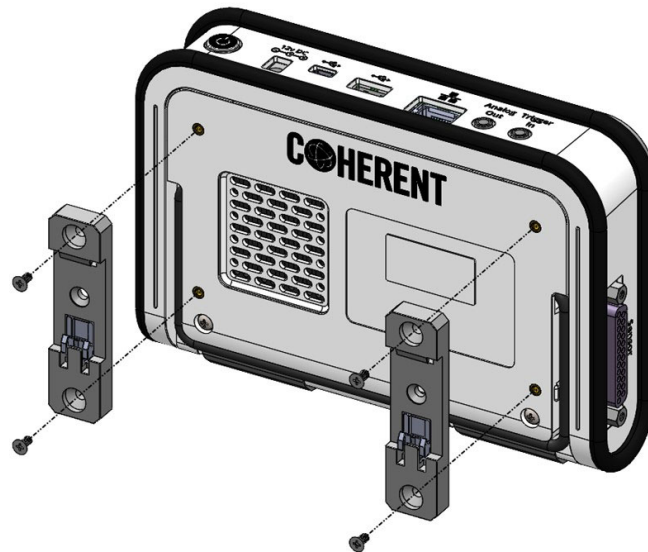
shows the location of the mount holes for the brackets on the meter:
